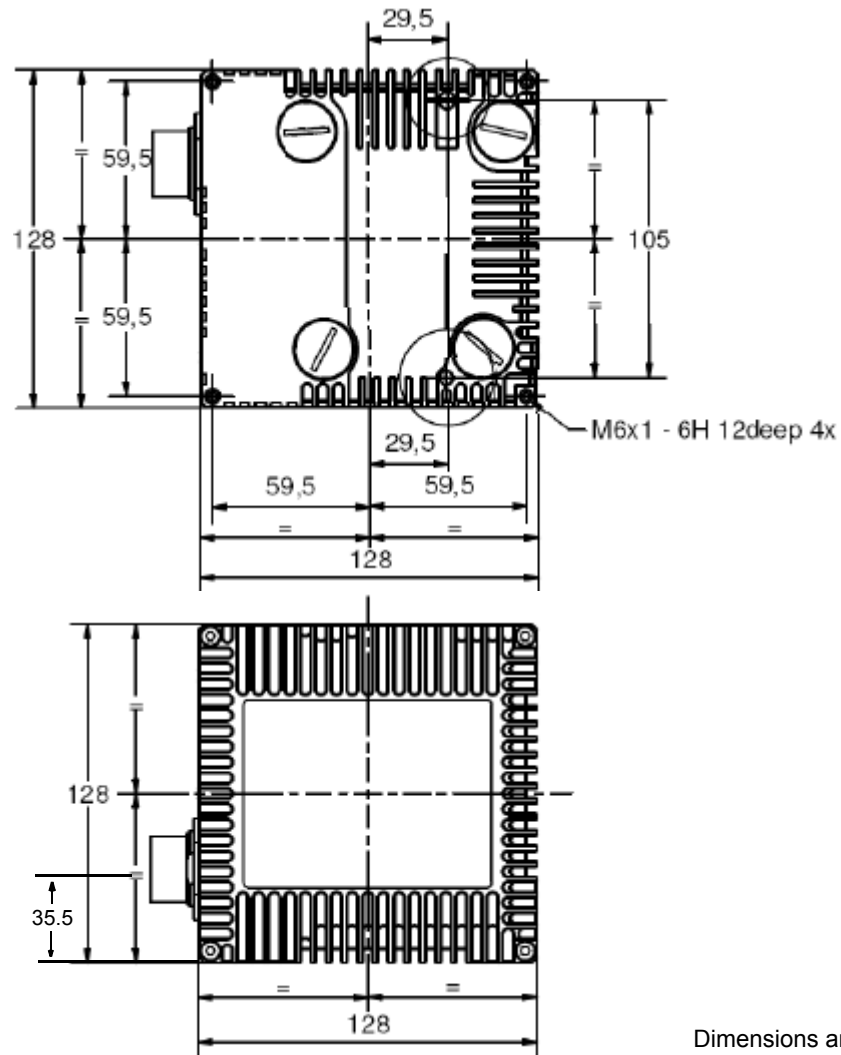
iIMU-FSAS Enclosure Side Dimensions
